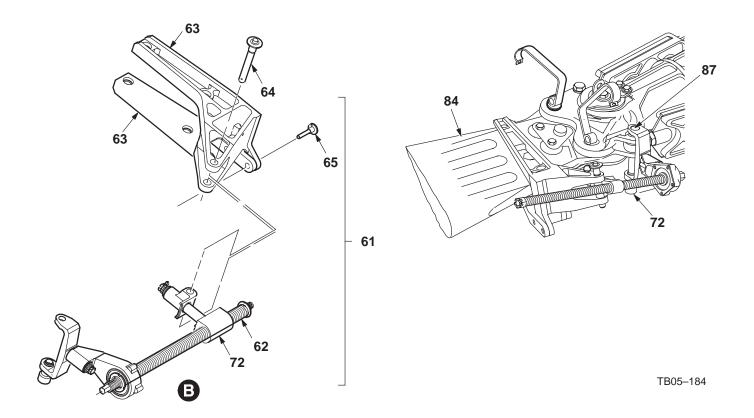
Blade Positioning Assembly on R/H AFT Main Rotor Blade
